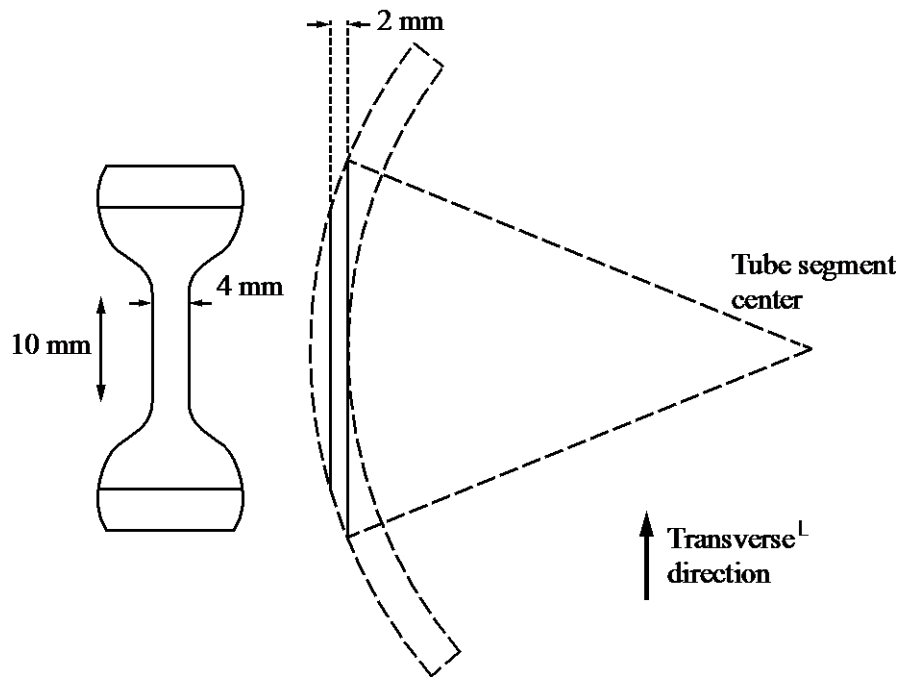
A schematic of a transverse tensile specimen machined from an as-received pressure tube
